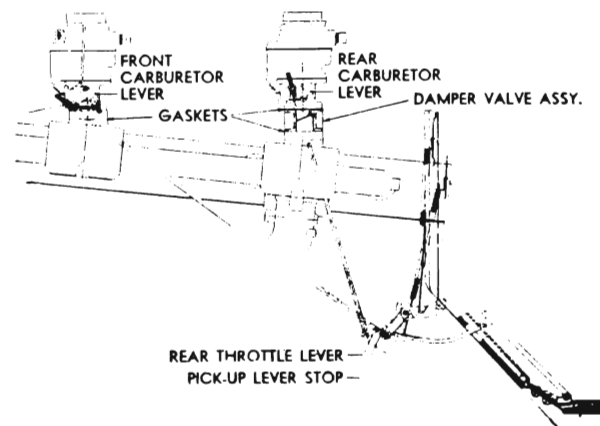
Throttle Linkage Adjustment—Compound Carburetion
